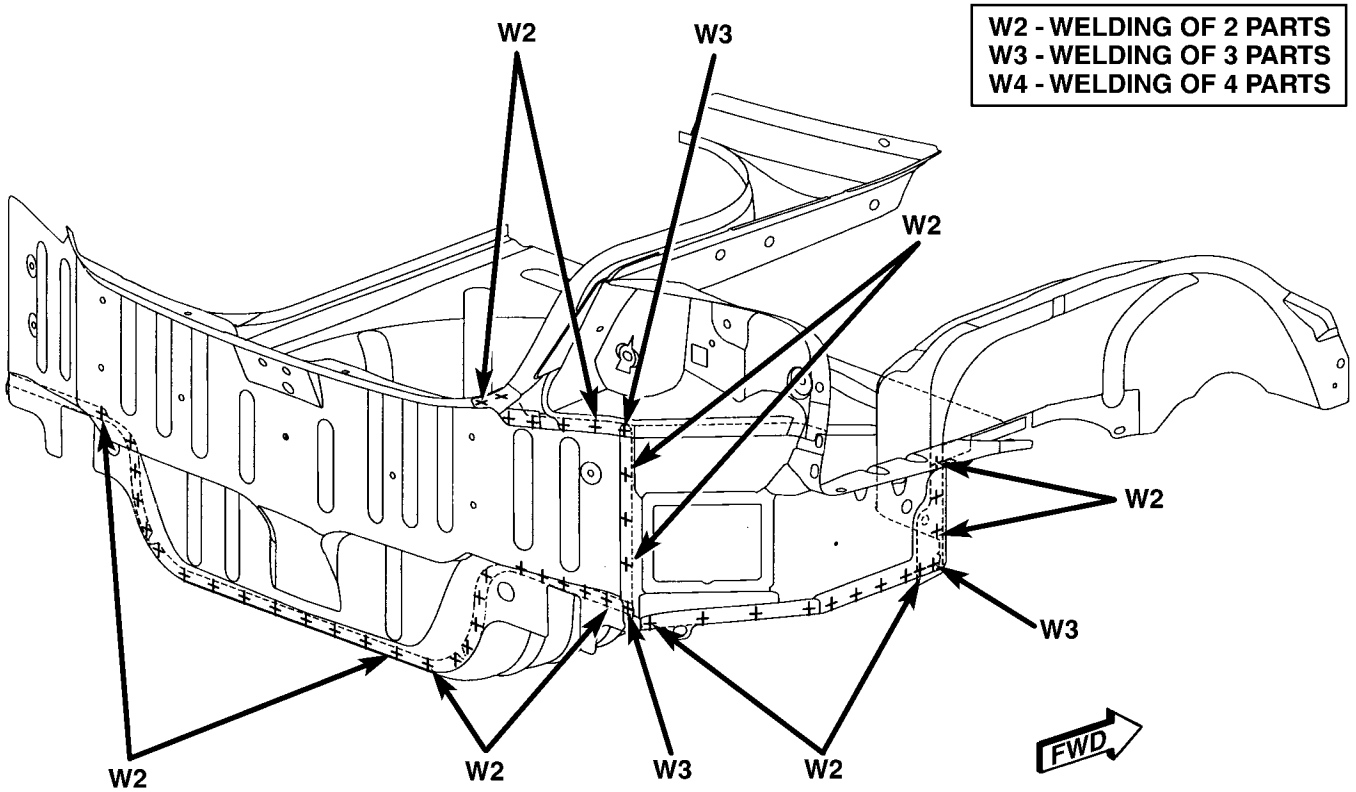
LOWER DECK OPENING PANEL TO QUARTER EXTENSION TO REAR FLOOR PAN
